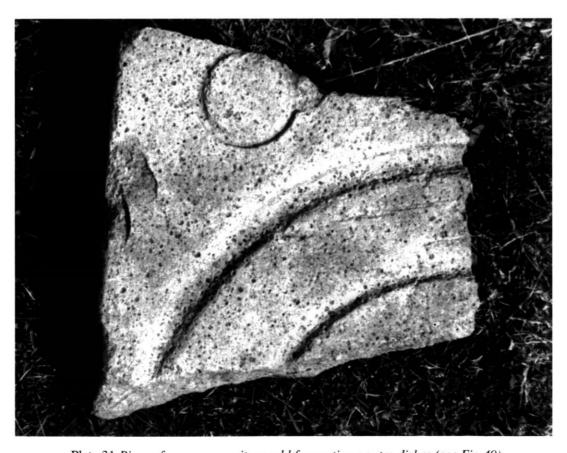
Piece of an open granite mould for casting pewter dishes (see Fig 49)
